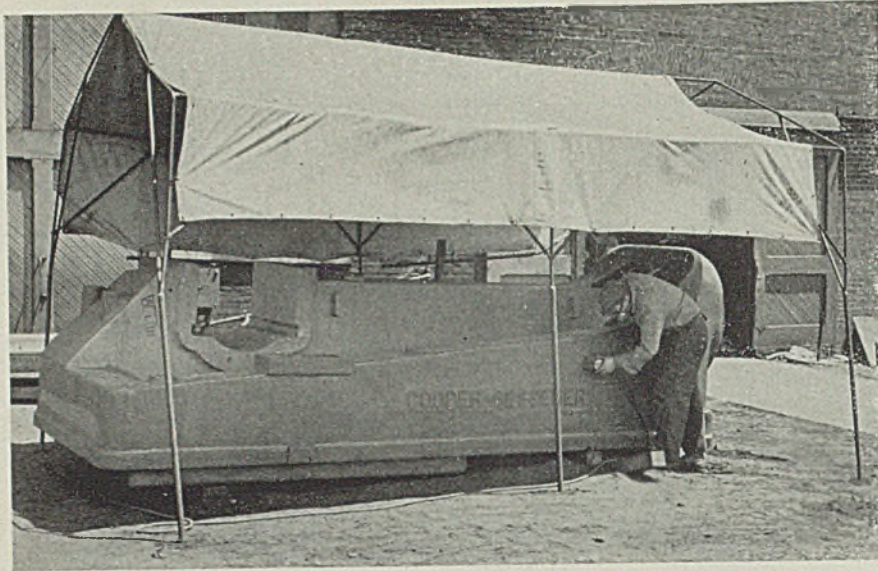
Canvas stretched over welded pipe frame enables much of the finishing work on large castings to be handled out-of-doors even in hot or rainy weather
